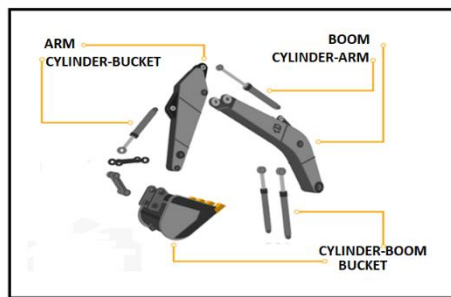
Components of a hydraulic excavator with a backhoe bucket
